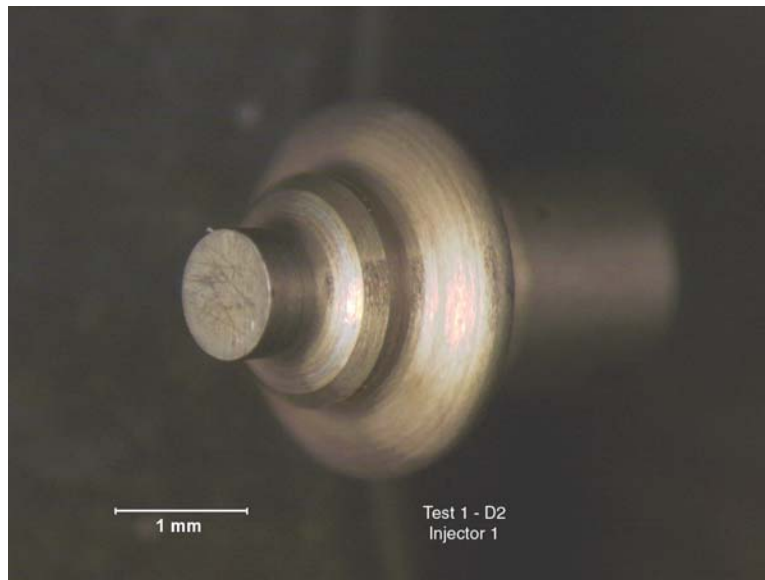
AF7469 ULSD, Fuel Injector Control Valve
